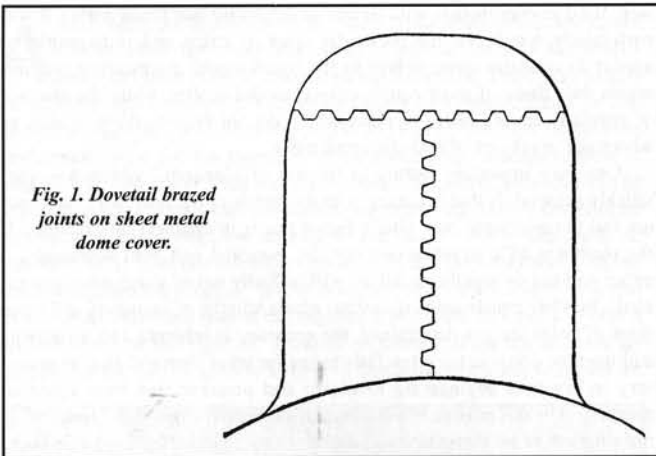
Dovetail brazed joints on sheet metal dome cover.
